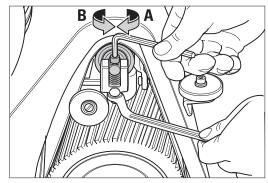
Adjust the belt tracking at the setting screw of the drive unit (see description on the left).
